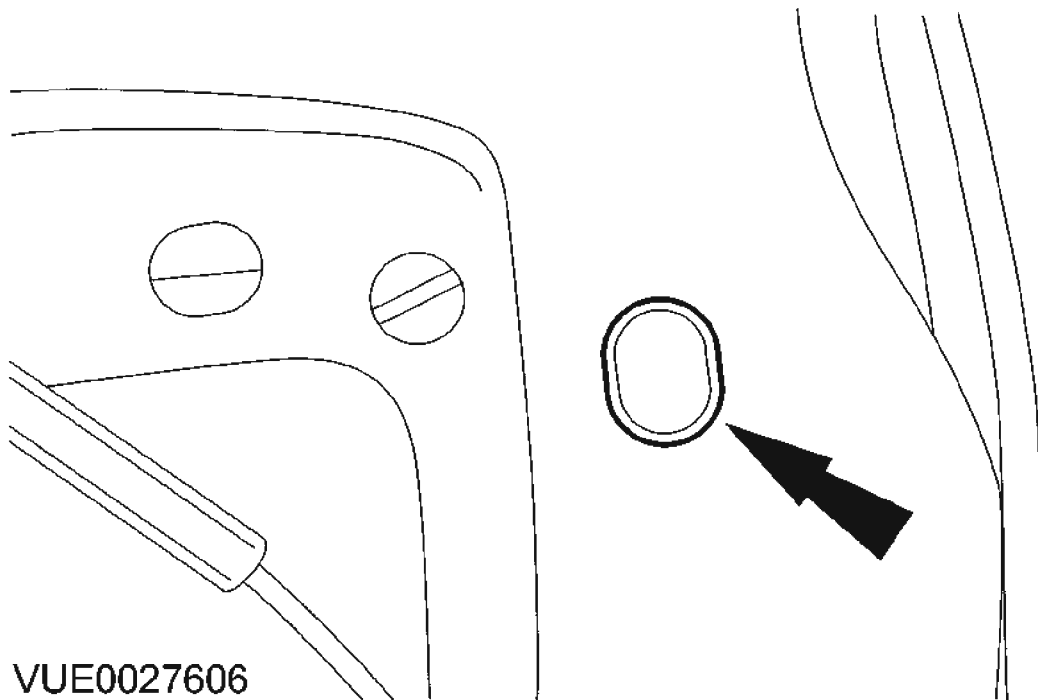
Removing Exterior Door Handle Access Hole Grommet From Door
